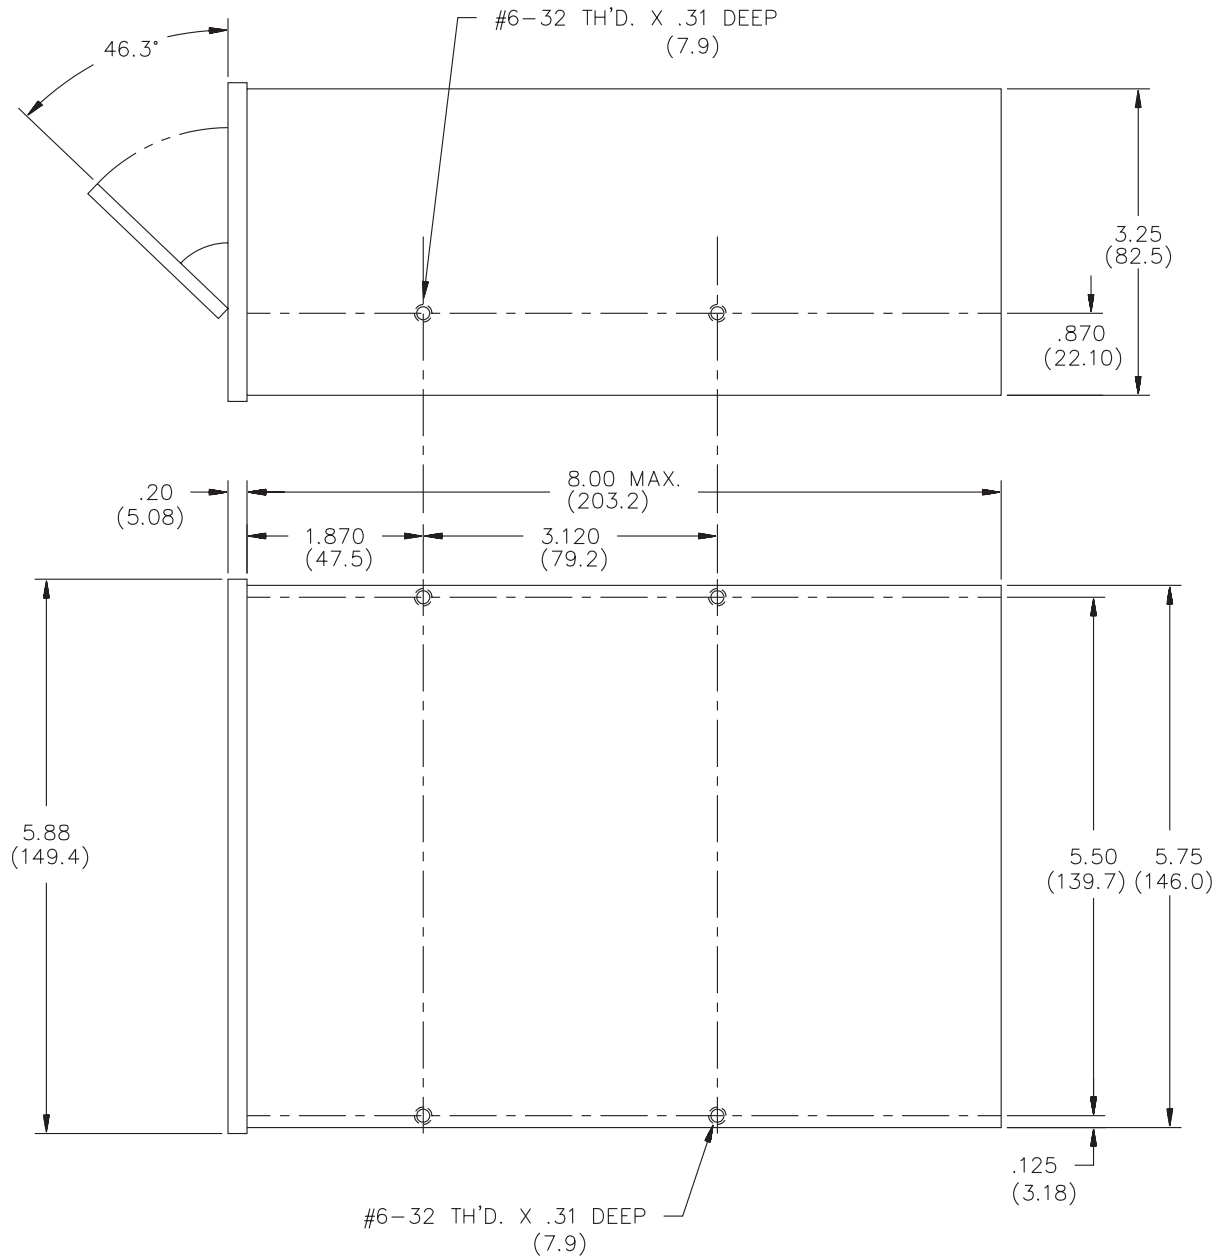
External Dimensions of the EXB-8200 in Inches (and Millimeters)
